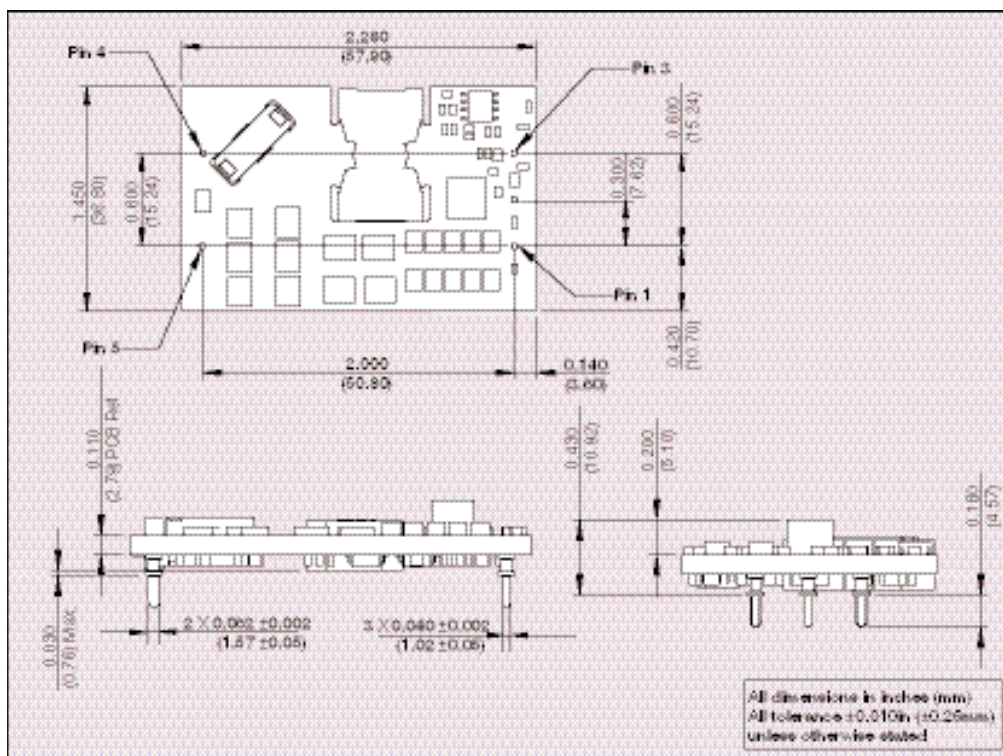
Horizontal Mechanical Drawing and Pinout Table
